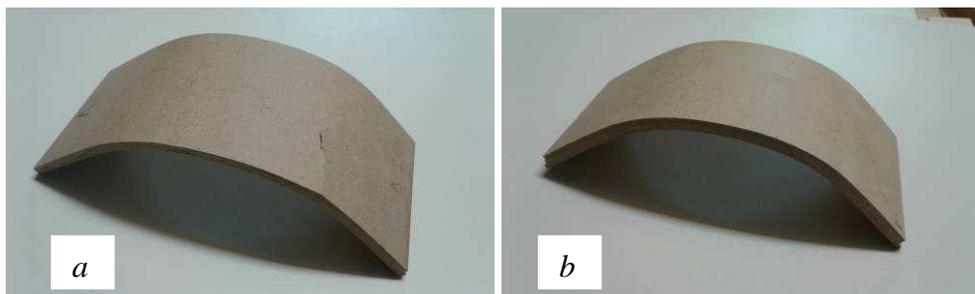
Experimental samples. a - Cracks resulting from bending and welding; b - Non-defectively bent glued sample
